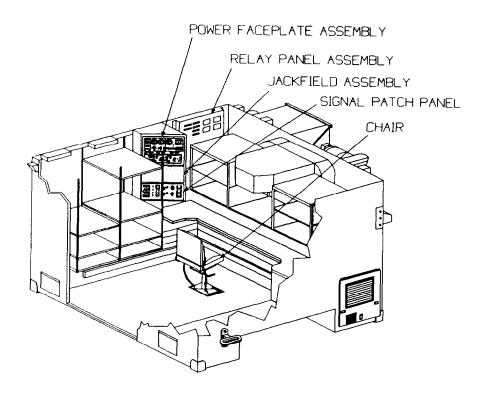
SICPS Shelter (Sheet 3 of 3) (Internal View)
